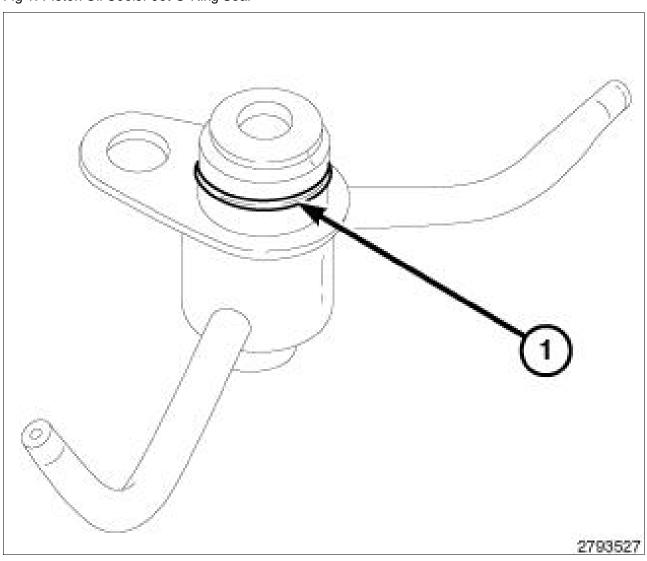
Piston Oil Cooler Jet O-Ring Seal
